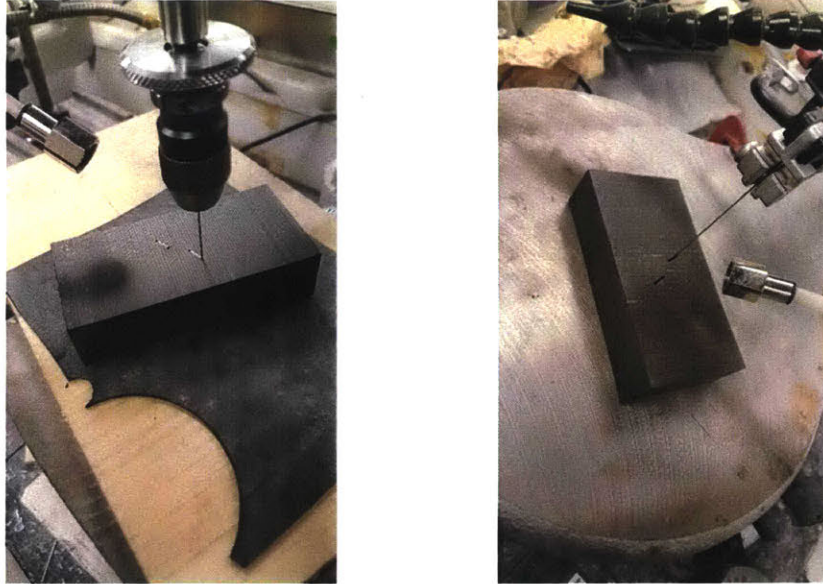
Left: drilling holes at flaw tips using 0.75 mm electroplated diamond twist drills, sensitive hand-feeding chuck adapter, and peck drilling. Right: cutting flaws by connecting flaw tip holes using a scroll saw with 0.7 mm diamond wire.
